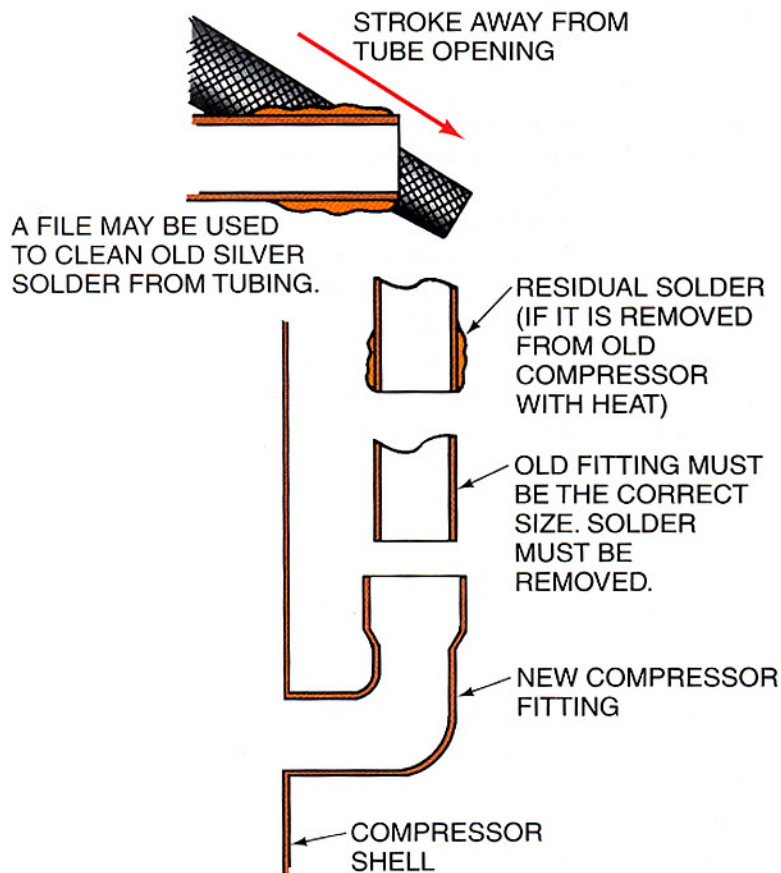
The old tubing must be cleaned of all old solder; a file may be needed.
